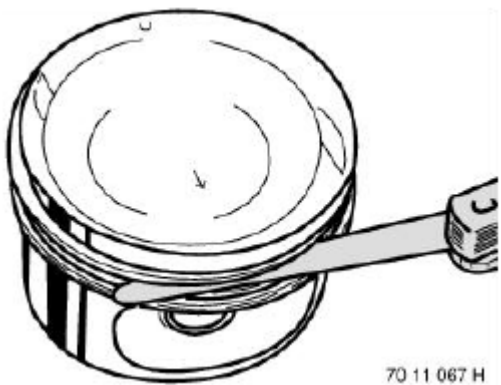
Measuring Axial Clearance Of Piston Rings In Piston Ring Groove
